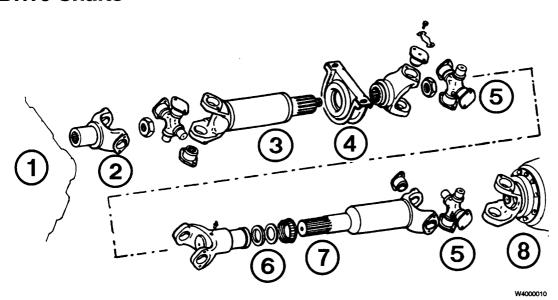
Typical Drive Shaft and Universal Joint Assembly
